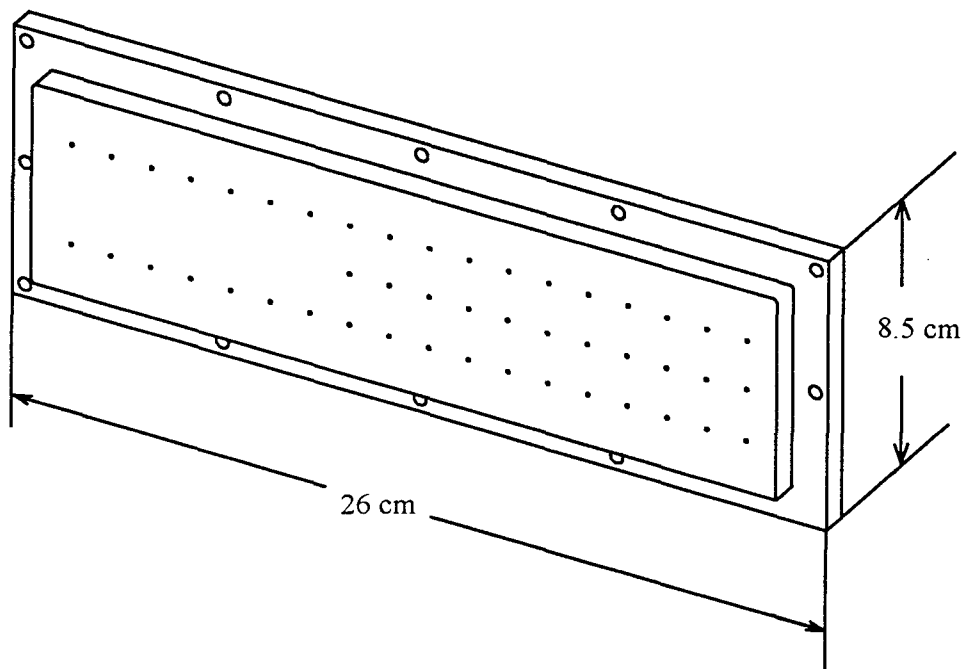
Side wall window with ports used in side wall pressure measurements.
